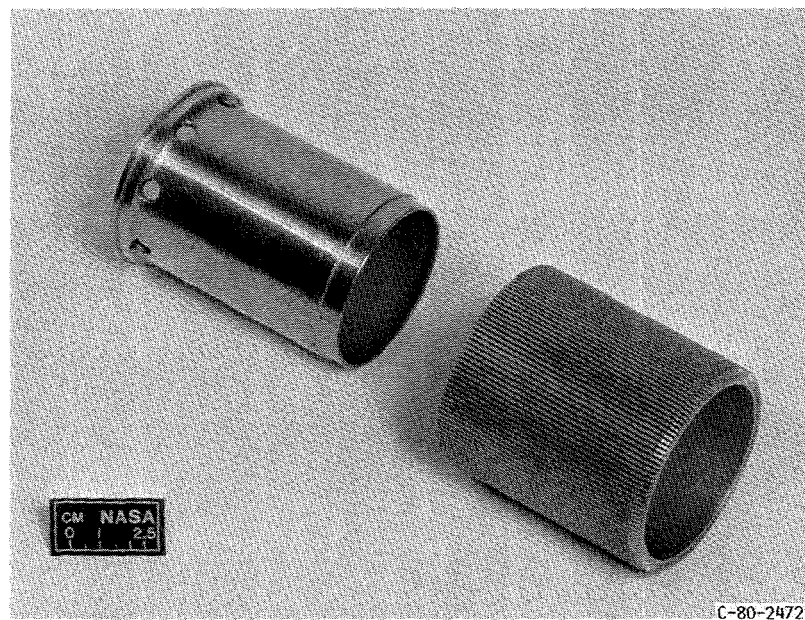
DISPLACER CYLINDER AND COOLER GAS PASSAGES.
